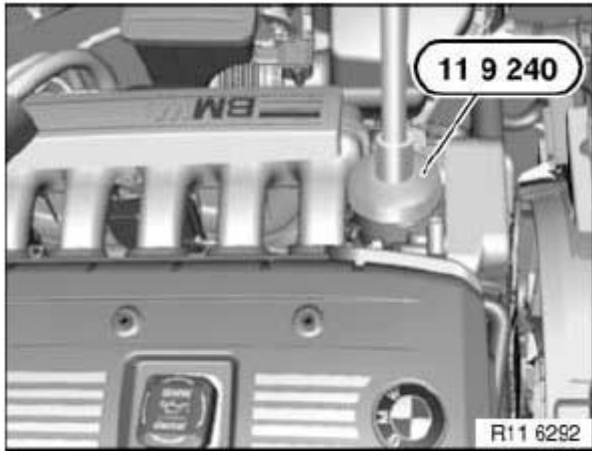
Special Tool (11 9 240) And Engine Oil Filter Housing
